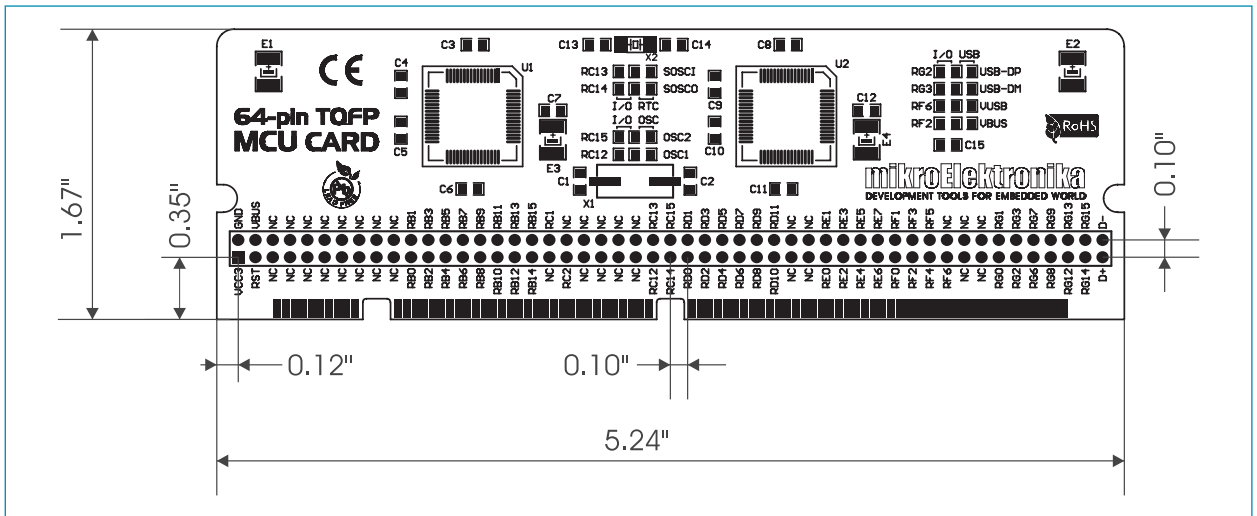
Dimensions of 44-, 64- and 80-pin TQFP MCU Card 1 MCU cards
